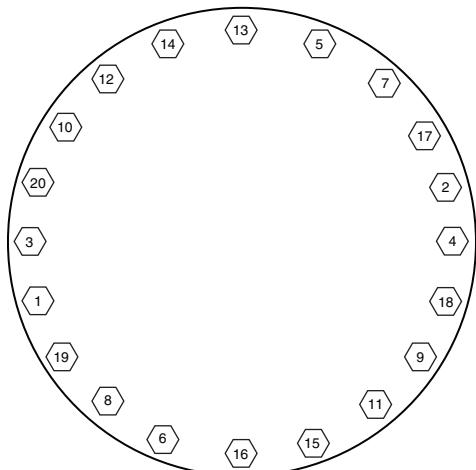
Cooler 150-200 Head Recommended Bolt Torque Sequence
